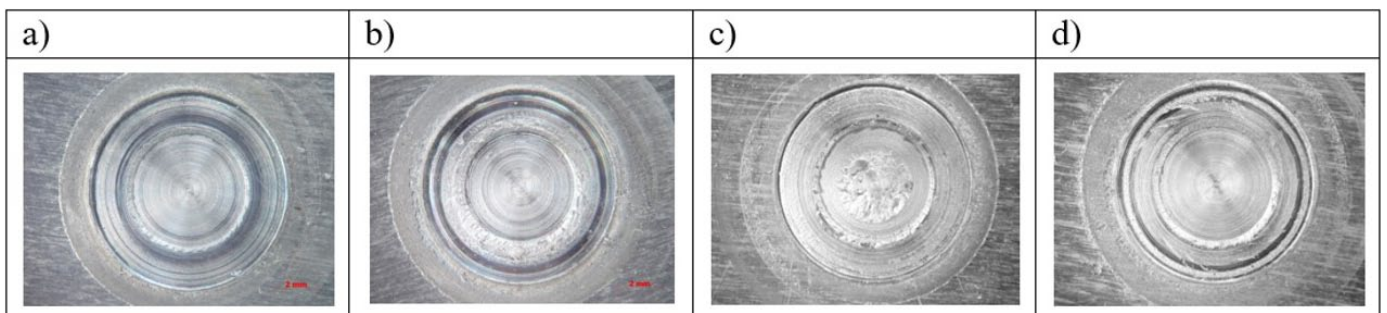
The face of welds made a) with the basic tool G0 and tools with modified geometry b) G1, c) G2, d) G3
